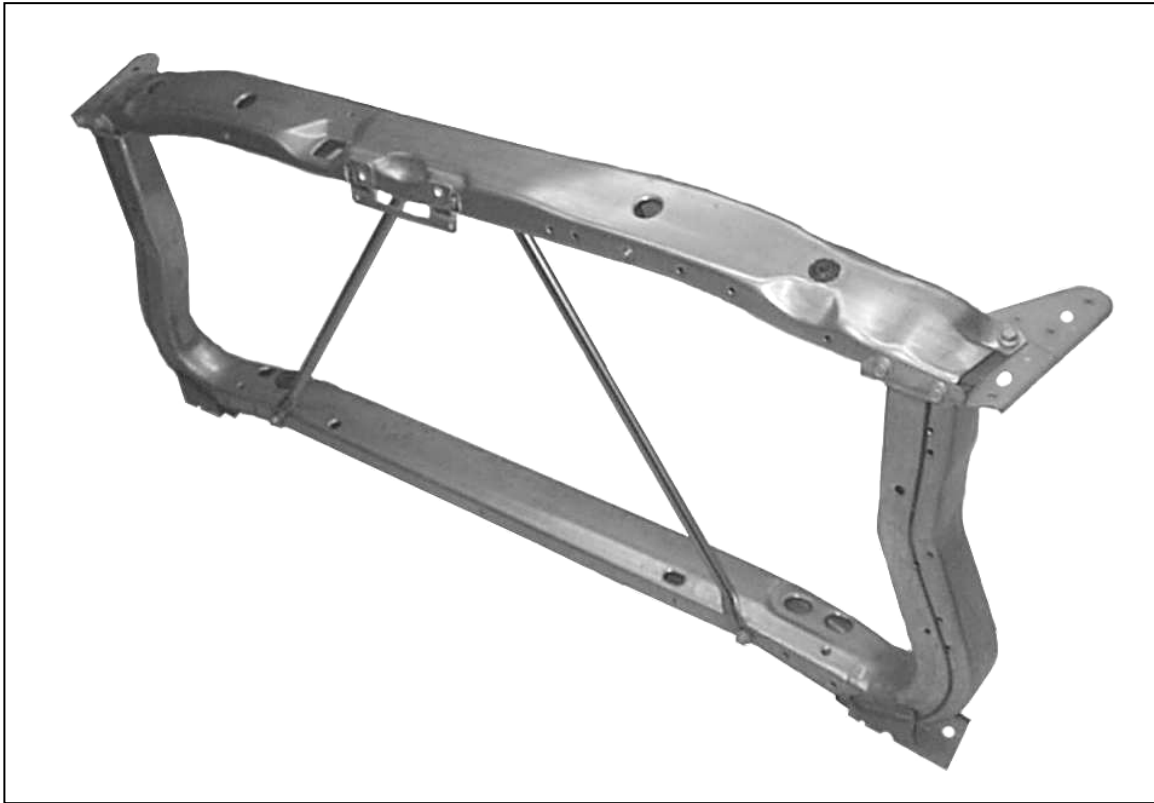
Ford CDW 27 Engine Cradle Assembly
